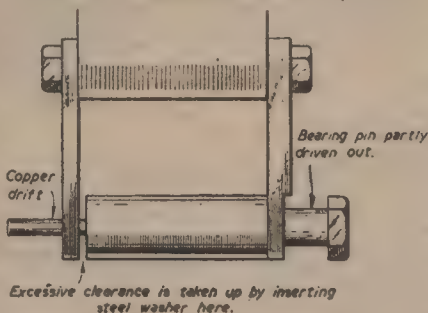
Excessive clearance between the side plates and spring bearings is taken up by the insertion of steel washers.
